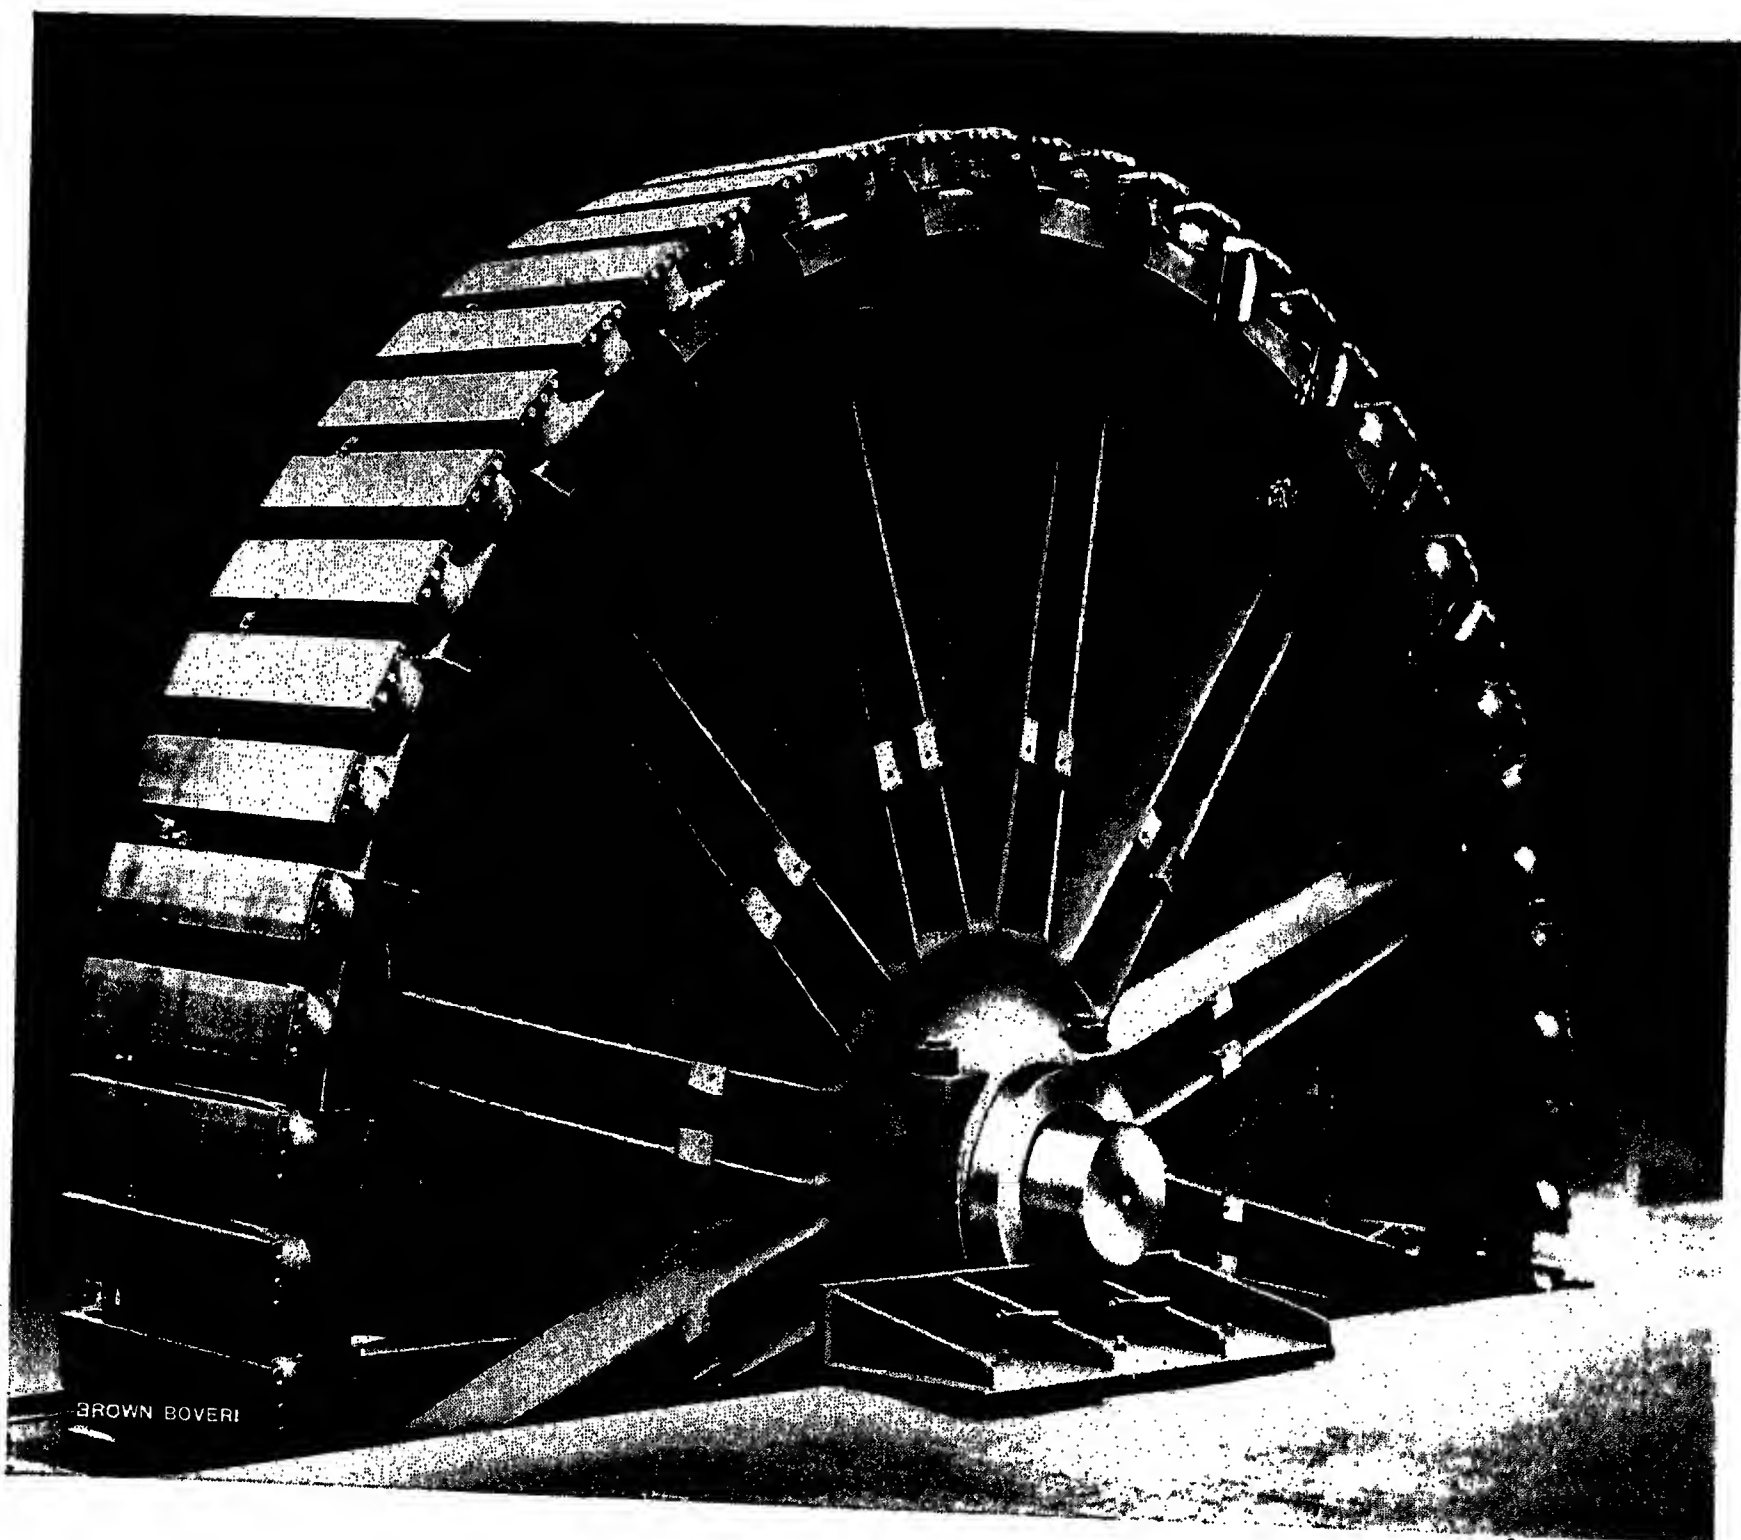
Statical balancing of a completed rotor for a vertical shaft alternator, 7050 kVA, 83.3 r. p. m.
